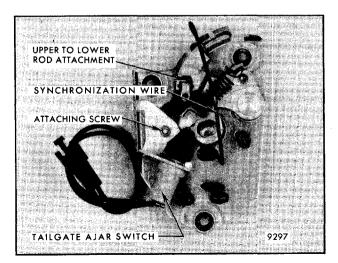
Tailgate Left Lower Lock Assembly
